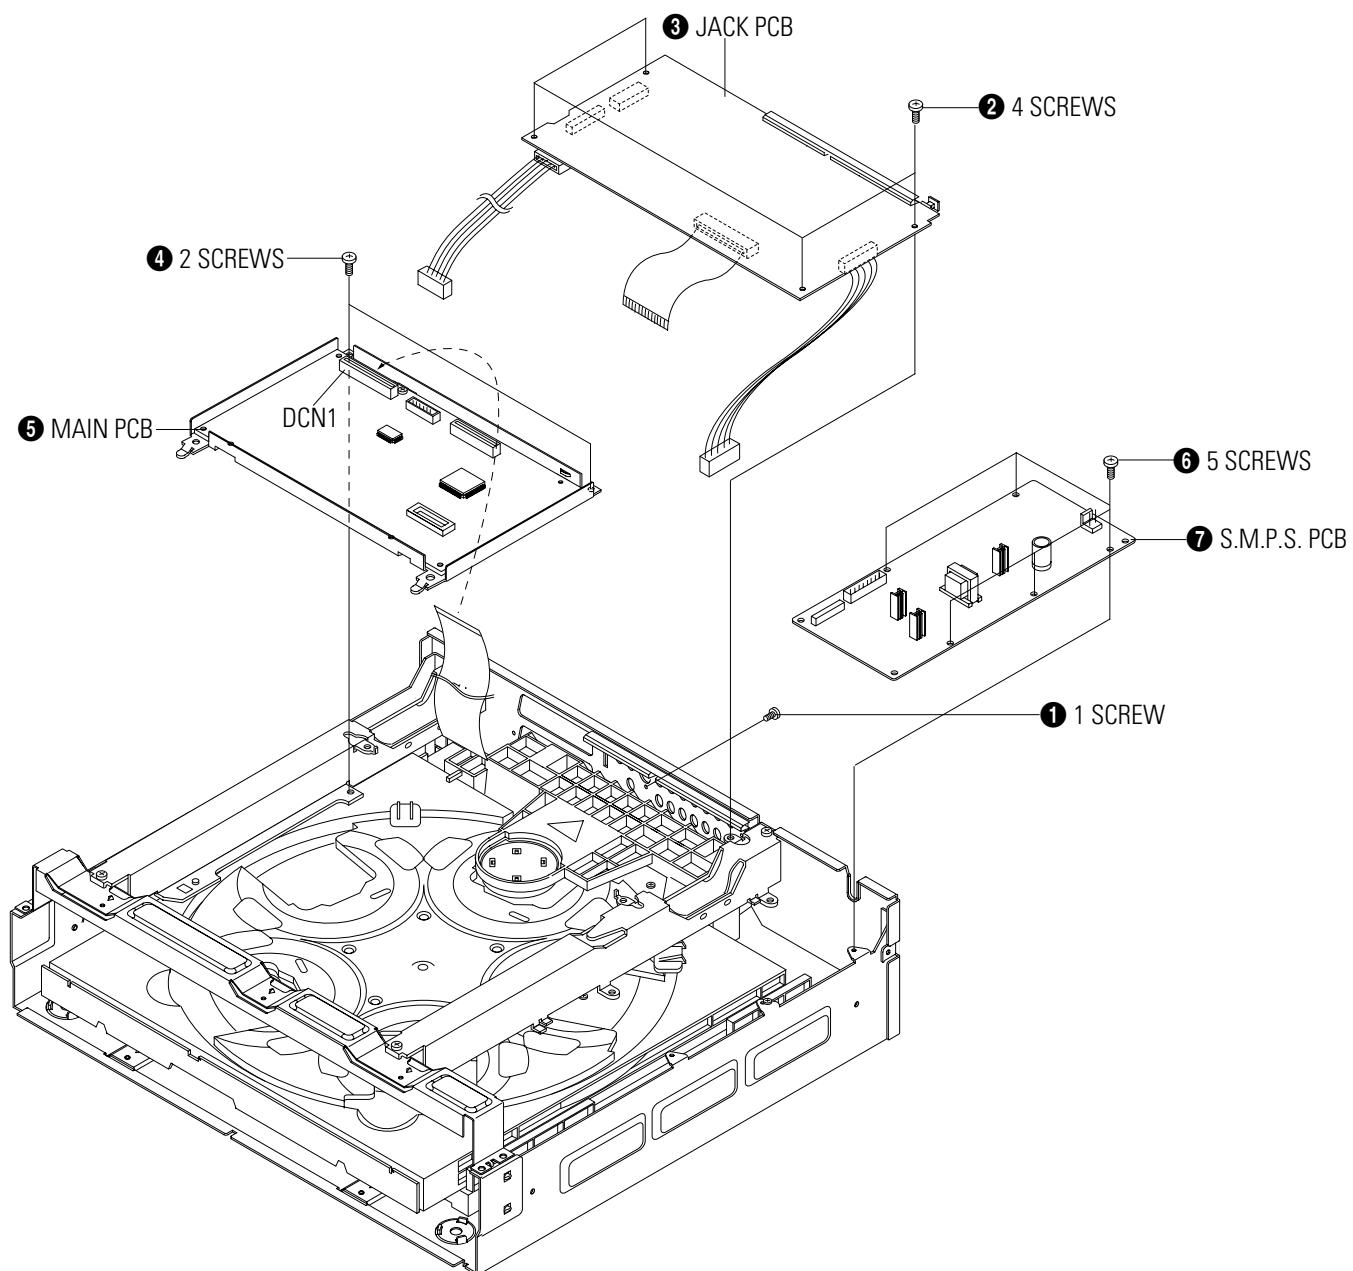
Main PCB, Jack PCB, S.M.P.S. Removal
